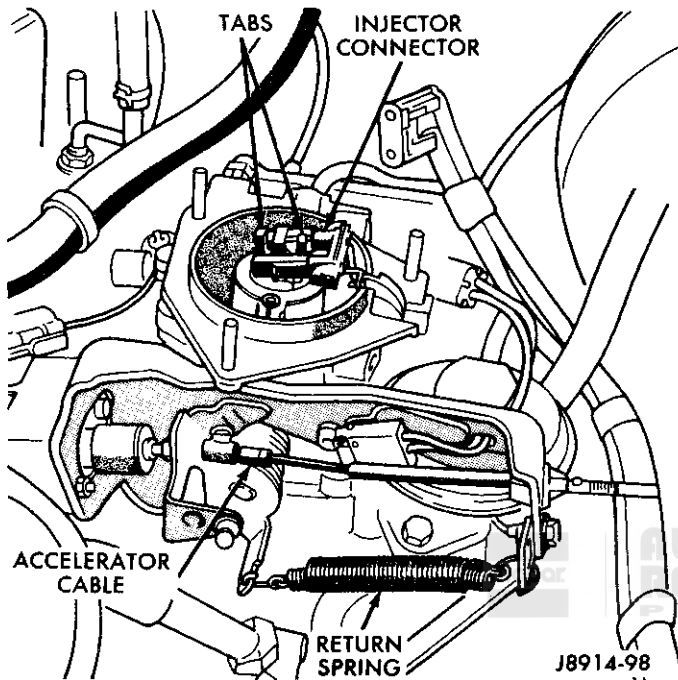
Accelerator Cable, Return Spring, Injector Connector.
